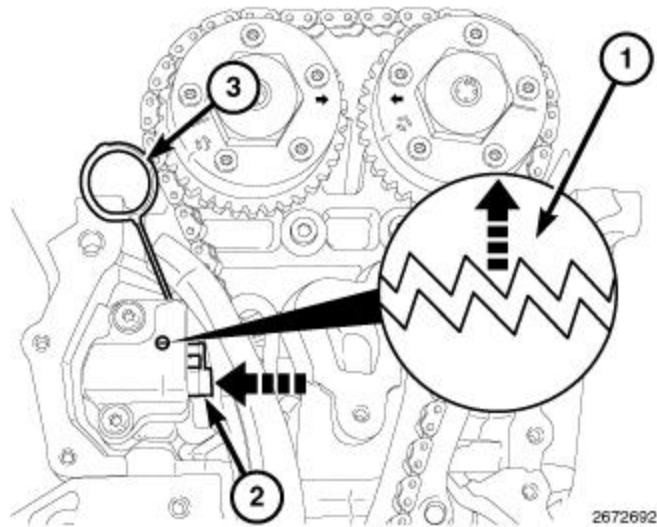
Resetting Left Cam Chain Tensioner By Lifting Pawl, Pushing Back Piston & Installing Tensioner Pin
